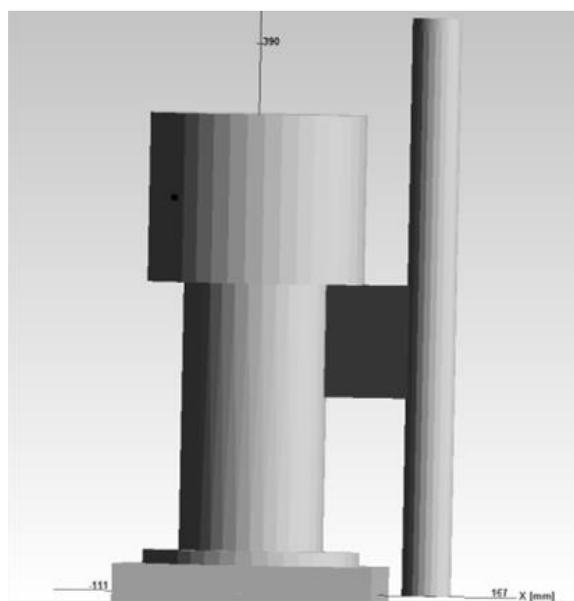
CAD model of casting in no-bake sand mold, with bottom *Cu*-water cooled chill.
